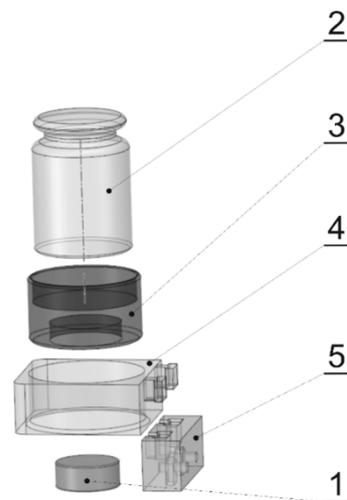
View of the disassemblable sample pusher: 1—analyzed sample, 2—weight, 3—sample and weight seat, 4—disassemblable sample pusher, 5—disassemblable sample pusher-fixing part.
